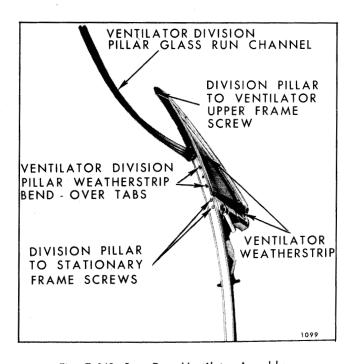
Rear Door Ventilator Assembly -68069-68169 Styles
